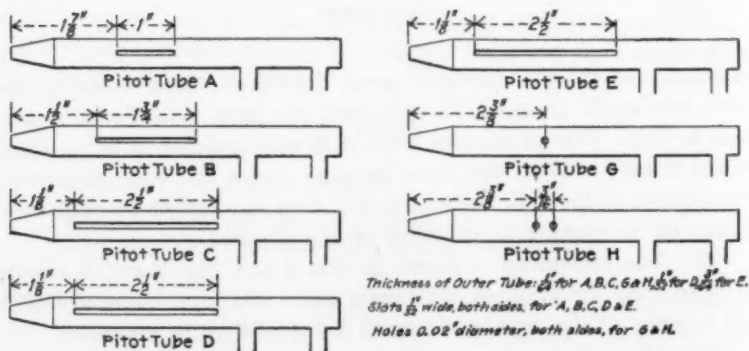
SKETCHES OF PITOT TUBES A TO H SHOWING DIMENSIONS OF STATIC OPENINGS
